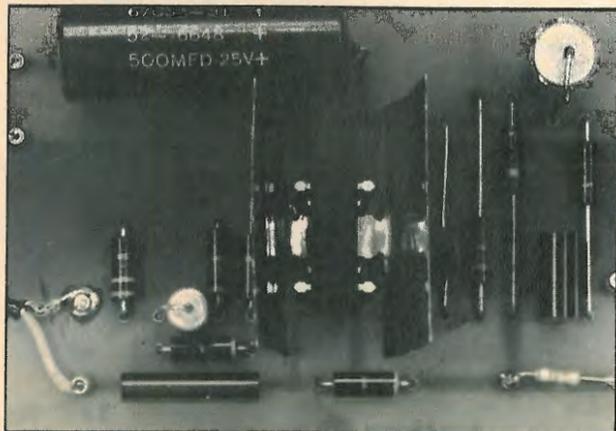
Complete circuit assembly of five watt IC assembly diagramed in Fig. 3.
